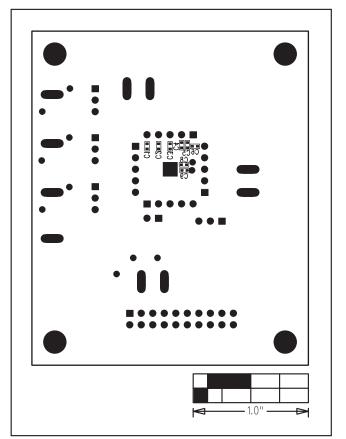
MAX6884 EV Kit Component Placement Guide— Solder Side
